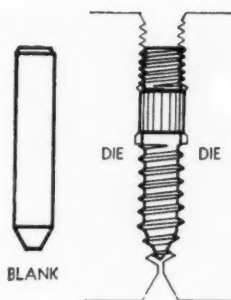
Rolling-machine screw and gimlet-point threads and knurling
